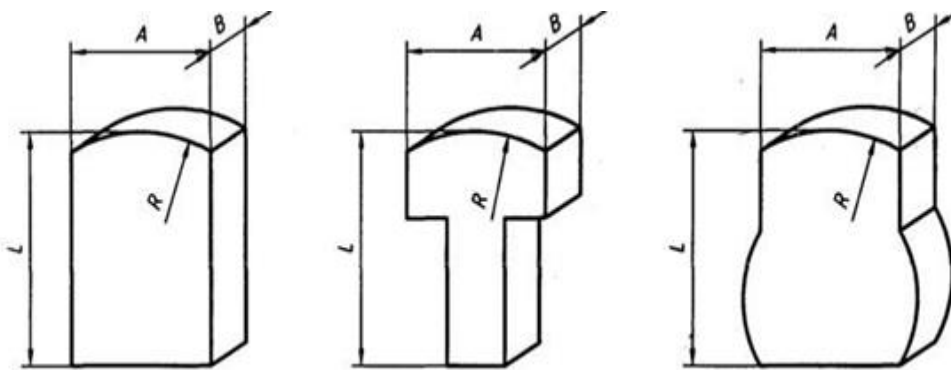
EXAMPLES OF MINIMUM DIMENSIONS OF EXPOSED PROTRUSIONS
